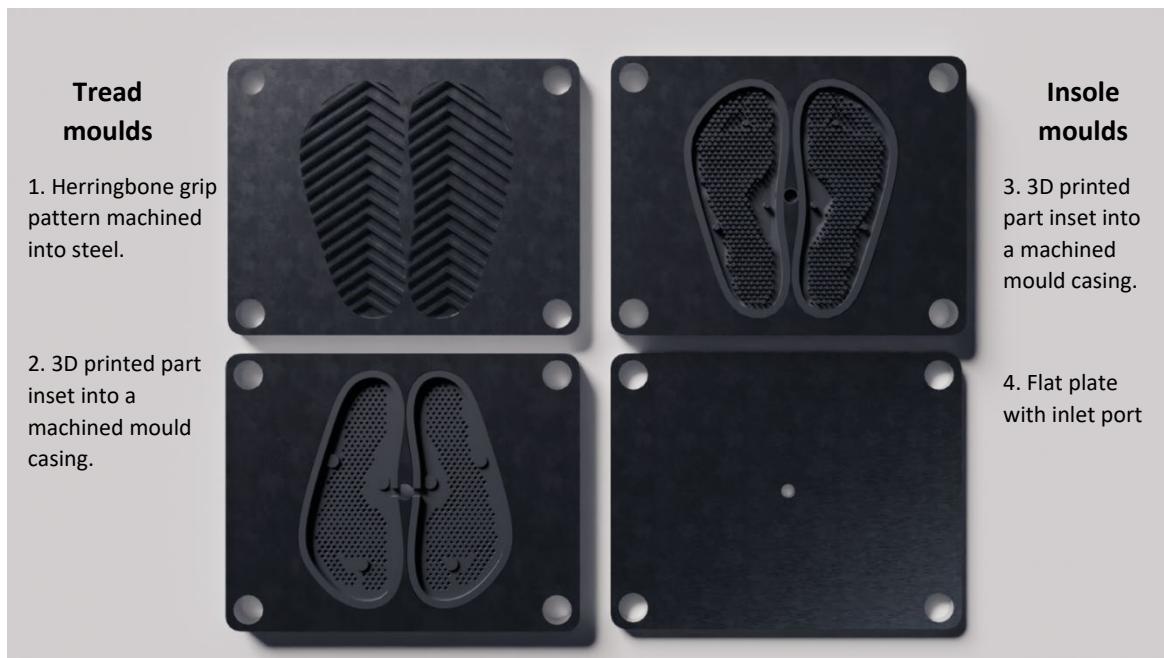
Proposed moulding tools for the design outlined in the report. Swappable 3D printed parts are inset into simple generic machined steel cradles.
